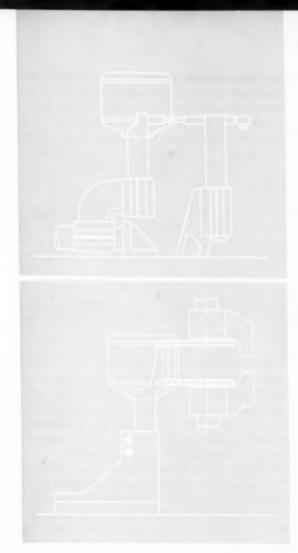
(above) Original setup for spot welding stainless fire boxes employed standard tooling except for slight change in lower electrode.
